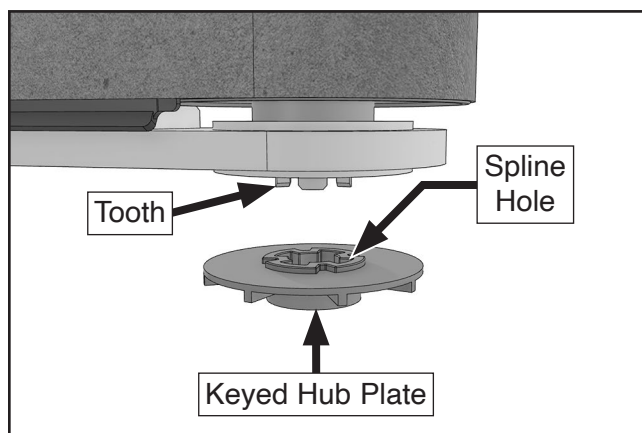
Edge sanding attachment teeth aligned with spline holes in keyed hub plate (table removed for clarity).
